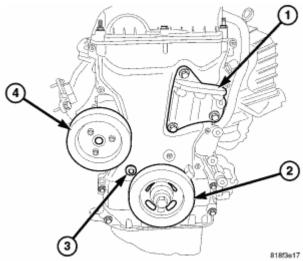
ENGINE FRONT Courtesy of CHRYSLER LLC
